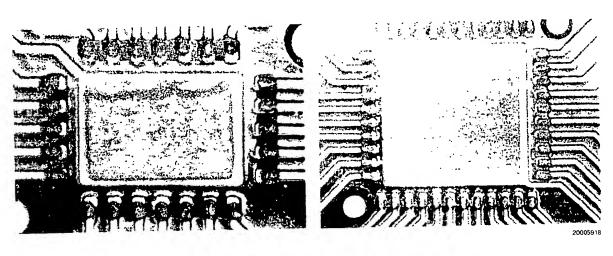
Solder Paste Printing of LLP 24 and LLP 44 Using 127 μm (5 mil) Thick Stencil
